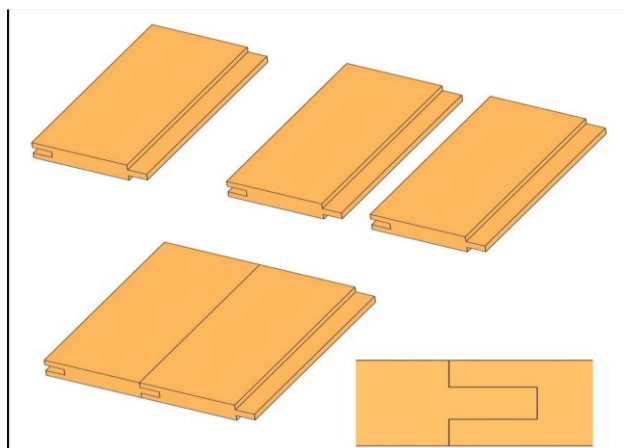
Tongue and groove joint with bead (Craftsmanspace,2025)
